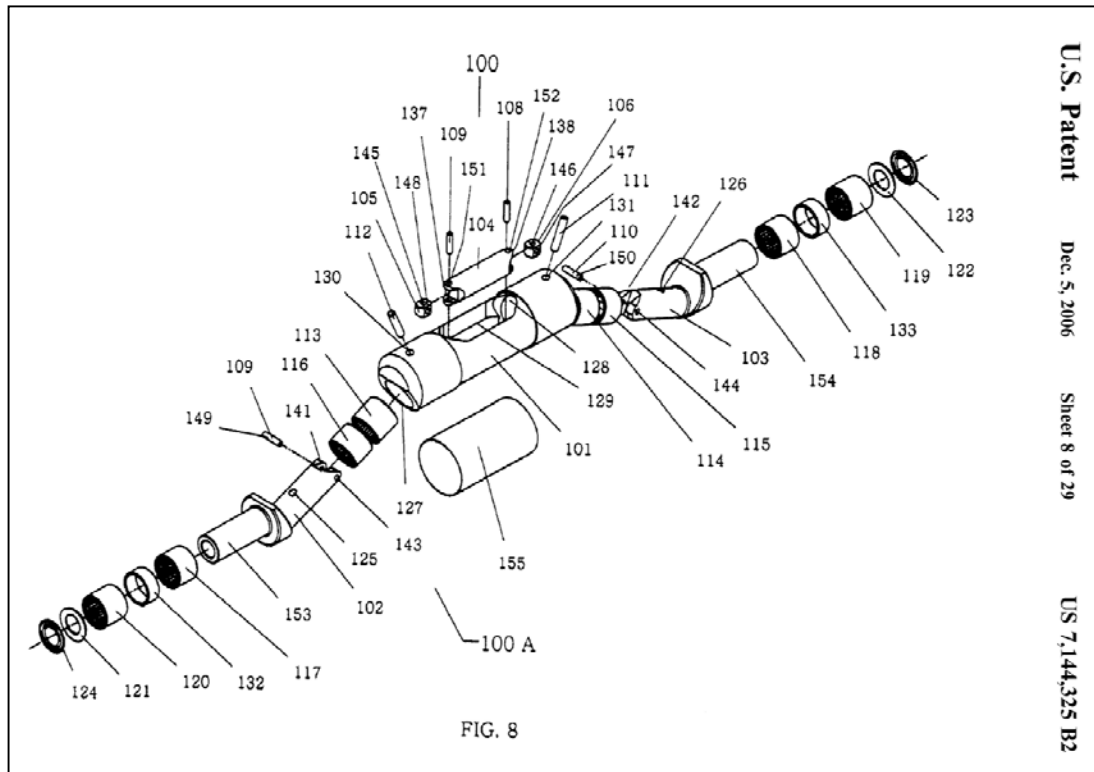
Cornay® Joint Centering Mechanism, Exploded View
